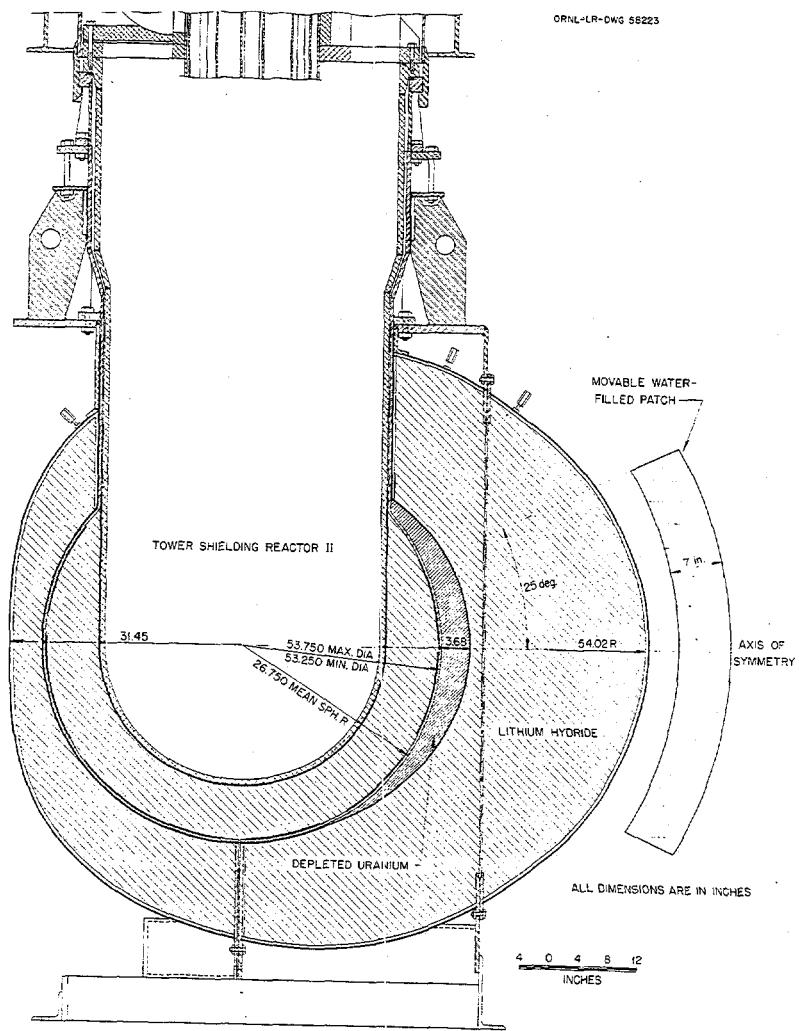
Cross-Sectional view of Pratt & Whitney Reactor Shield.
